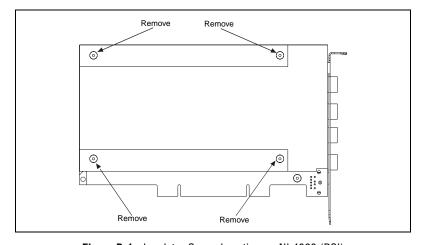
Insulator Screw Location on NI 4060 (PCI)
